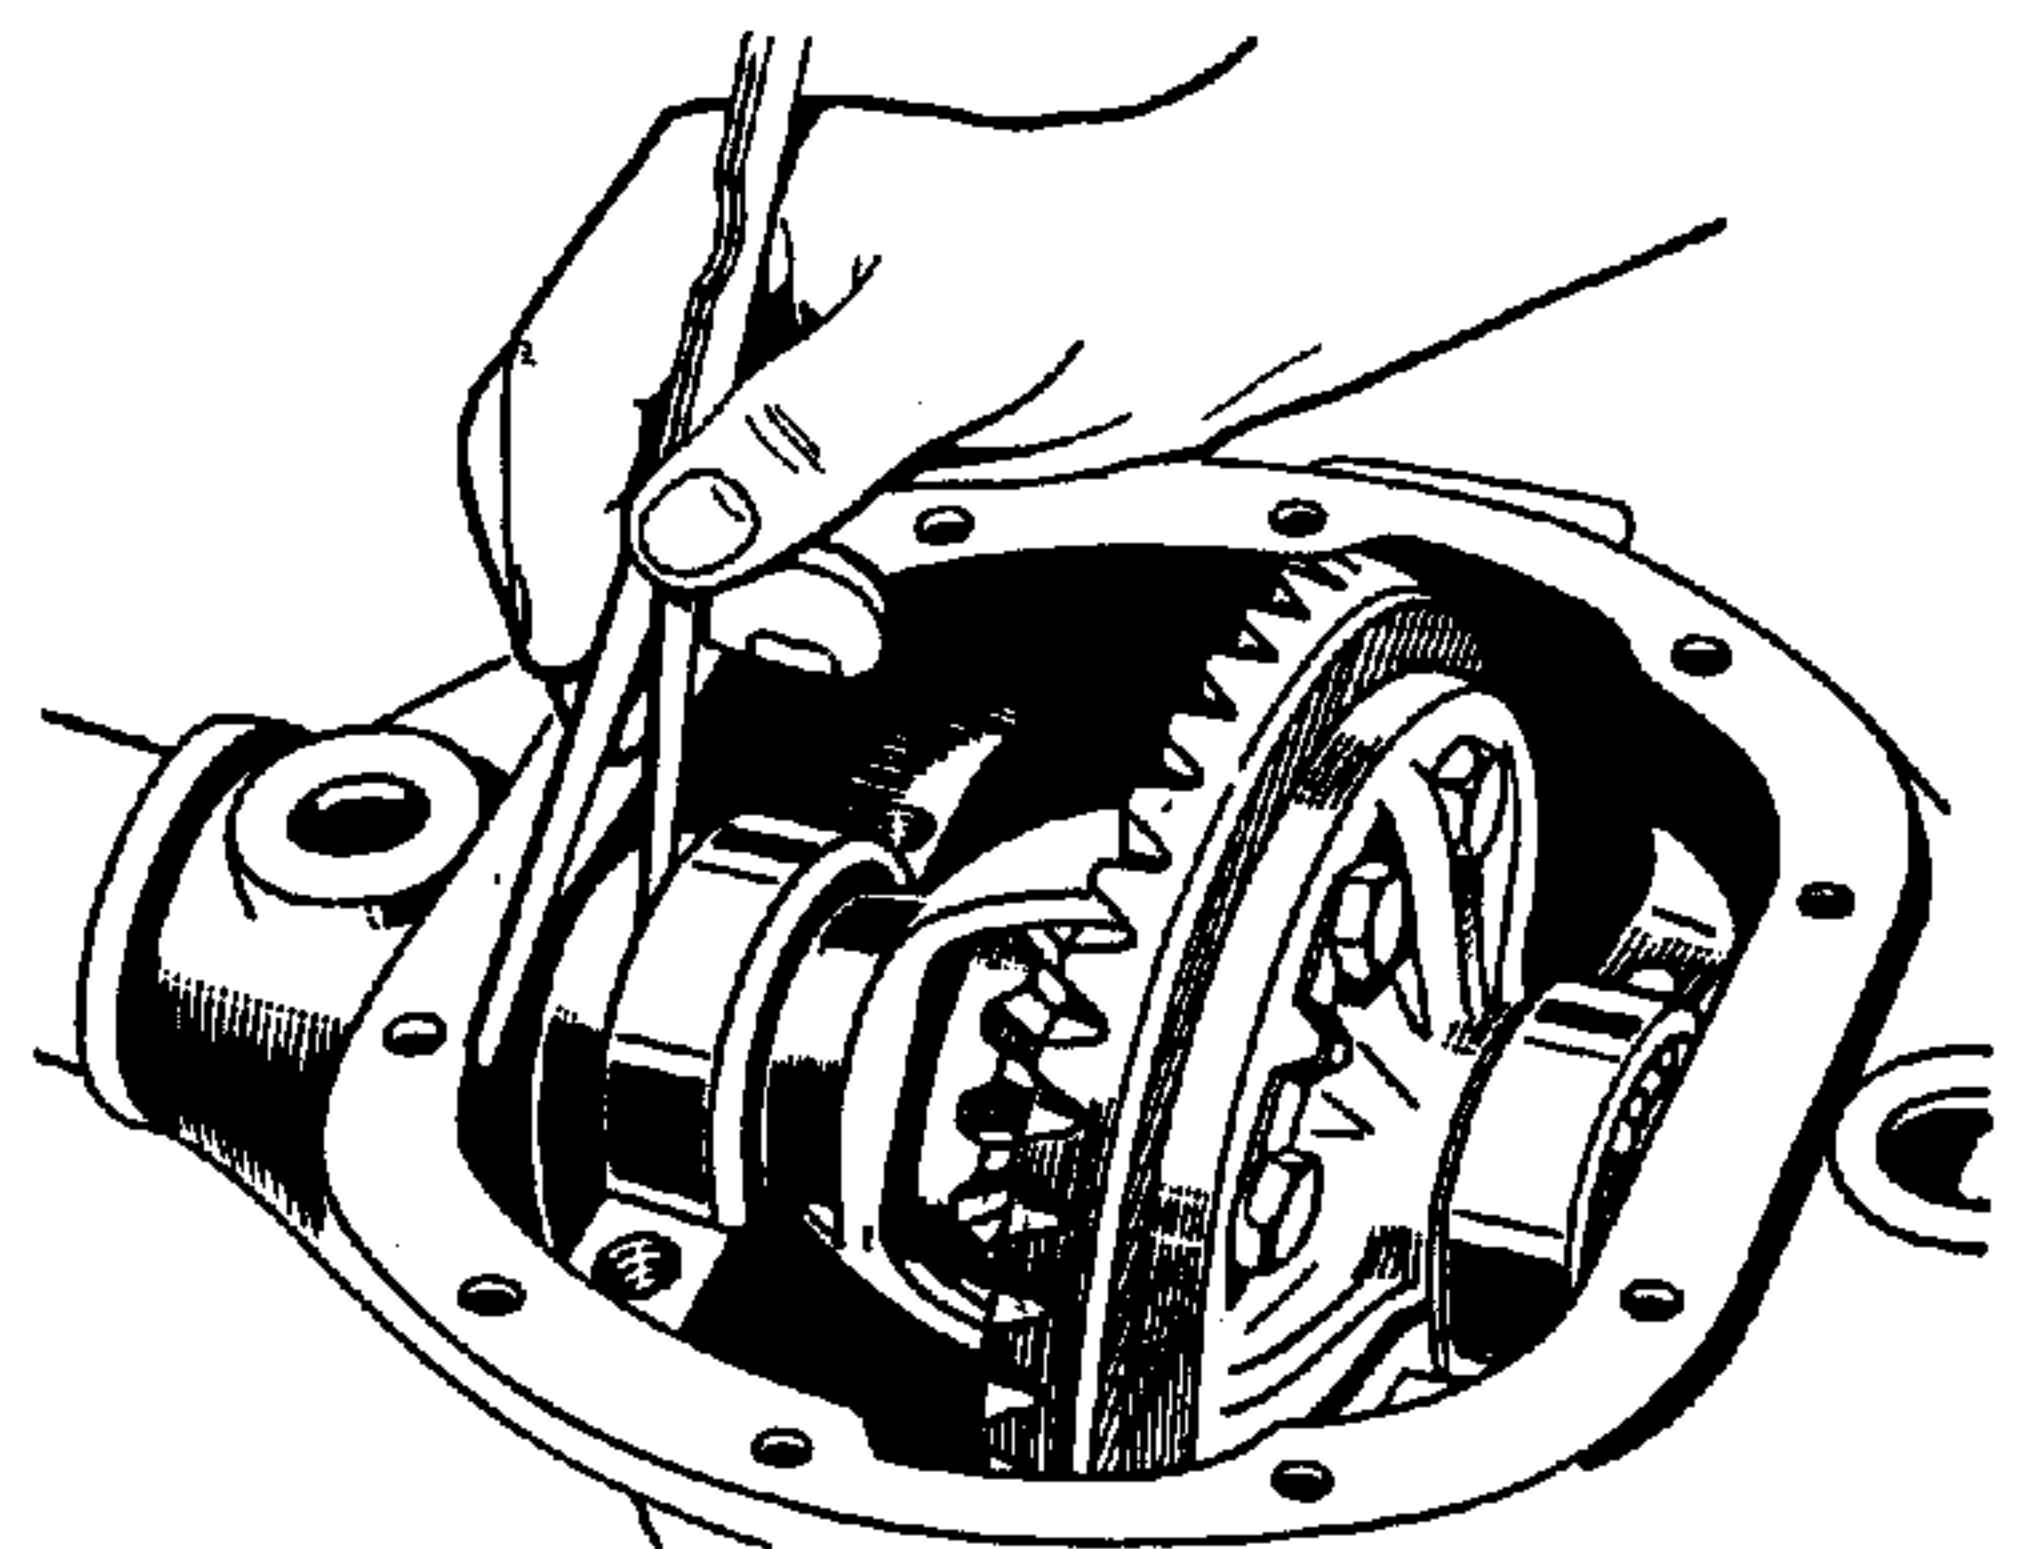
CHECKING DIFFERENTIAL BEARINGS
